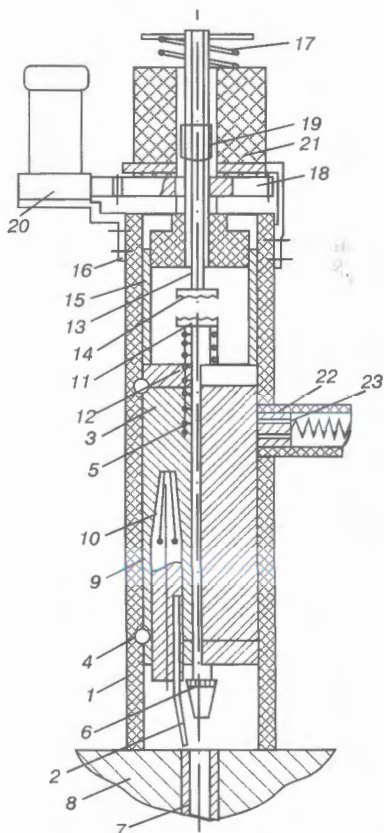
Semi-automatic welding device for making small-diameter circumferential welds (designations here and in Figure 2 are given in the text)
